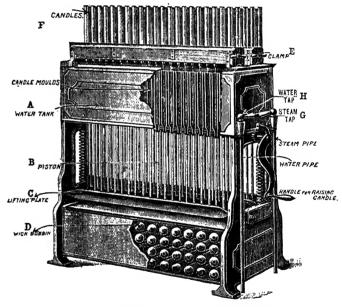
Modern Candle-Moulding Machine. (From J. Calderwood's "Manufacture of Candles," p. 15.)
